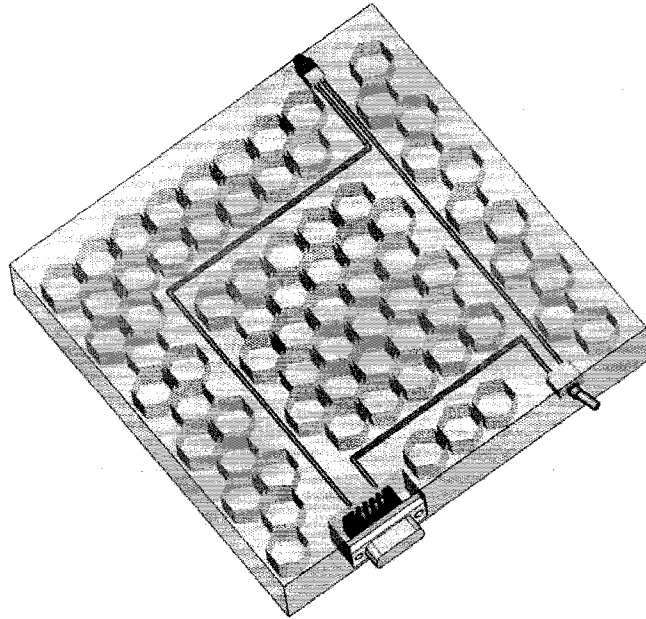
CAD model of an integrated structure built using UC and DW, shown with upper facesheet removed to illustrate the honeycomb network and embedded electrical traces.
